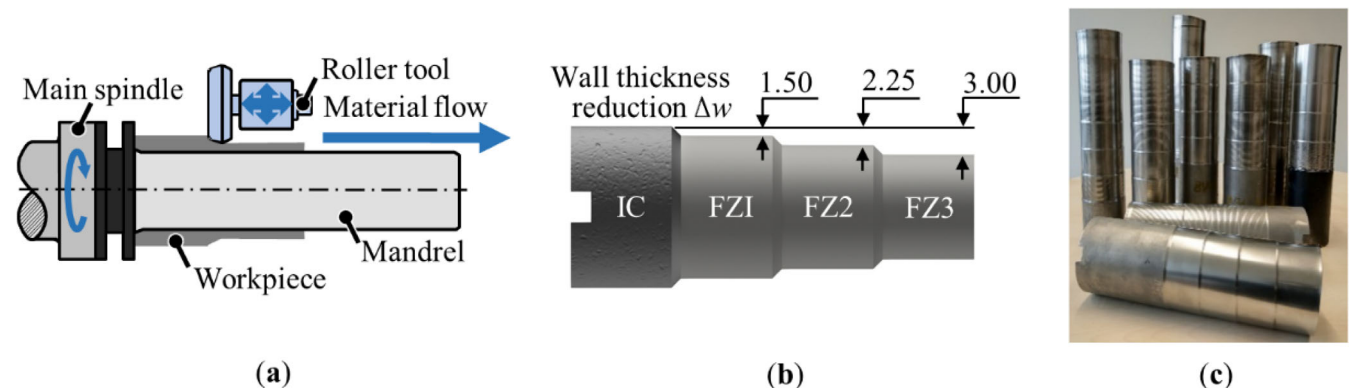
| Specimen manufacture: (a) flow forming process; (b) geometry and dimensions (in mm); (c) final workpieces. FZ: Forming zones 1–3; IC: Initial condition.
